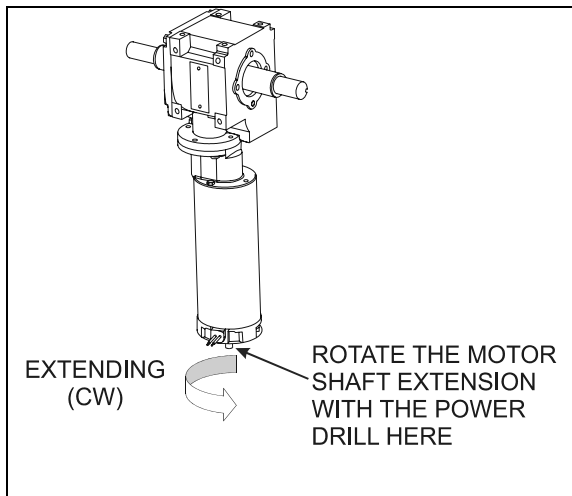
SLIDE-OUT MOTOR ROTATION
